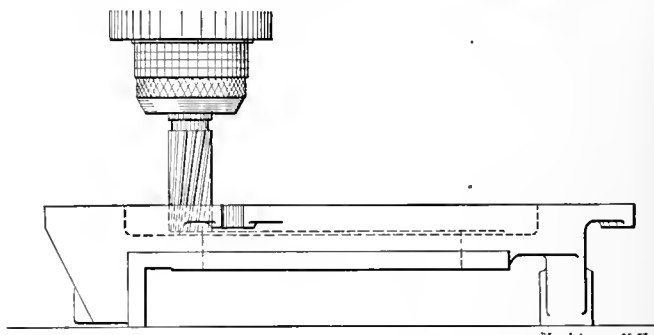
Milling Under Strap Strips with End Mill, using Vertical Spindle Machine.
